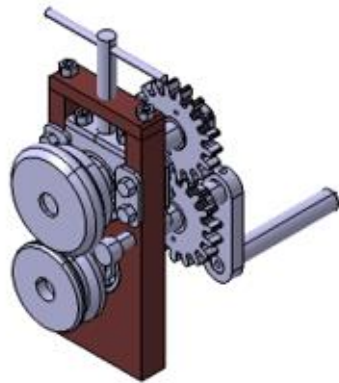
CAD model of Hemming with gears Figure 4.25: Prototype of Hemming tool with gears
